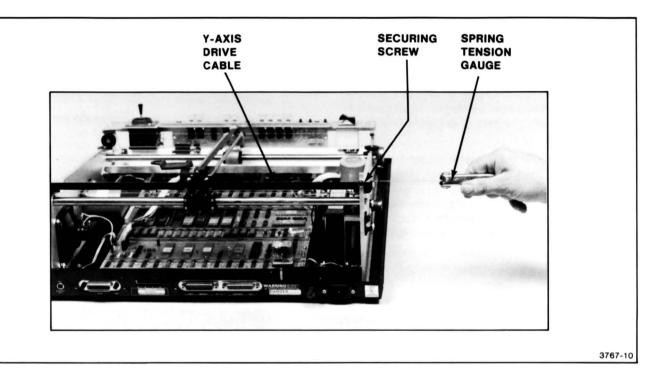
Y-Axis Pen Drive Cable Tension Adjustment.
